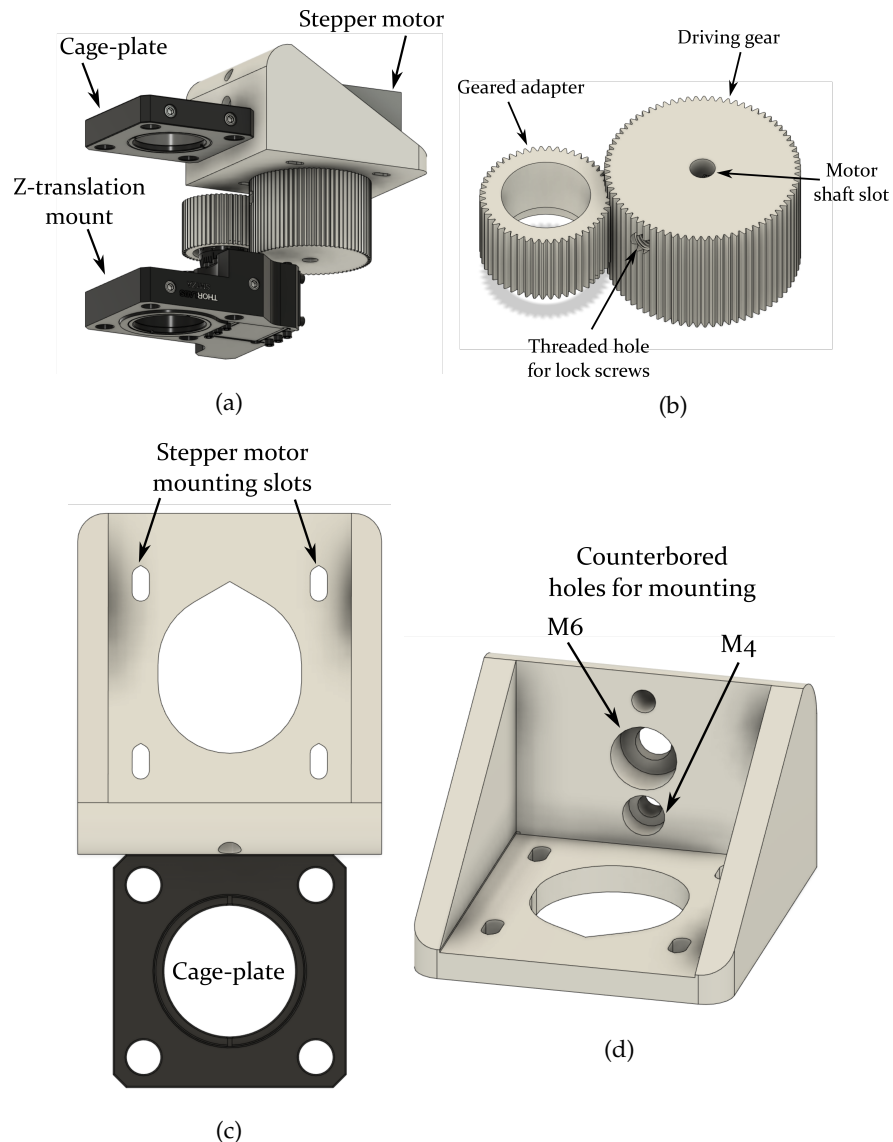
CAD drawings of the focus motor adapter. (a) Adapter assembly as used in the cage. (b) Adapter and mounting slots for the stepper motor. (c) Adapter and mounting holes for attaching to the cage plate. (d) The driving gear on the motor shaft, and gear adapter which slots over the Z-translation thumbscrew.
